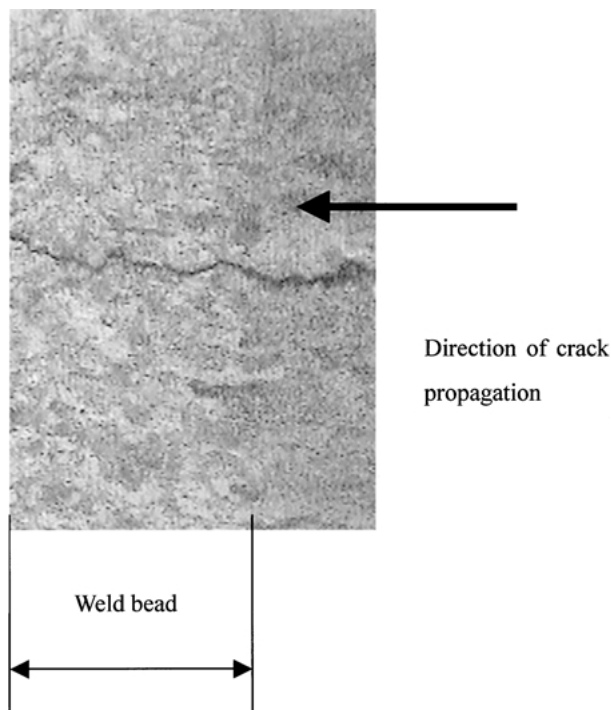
Photograph of cracked weld-surface of Type F.
